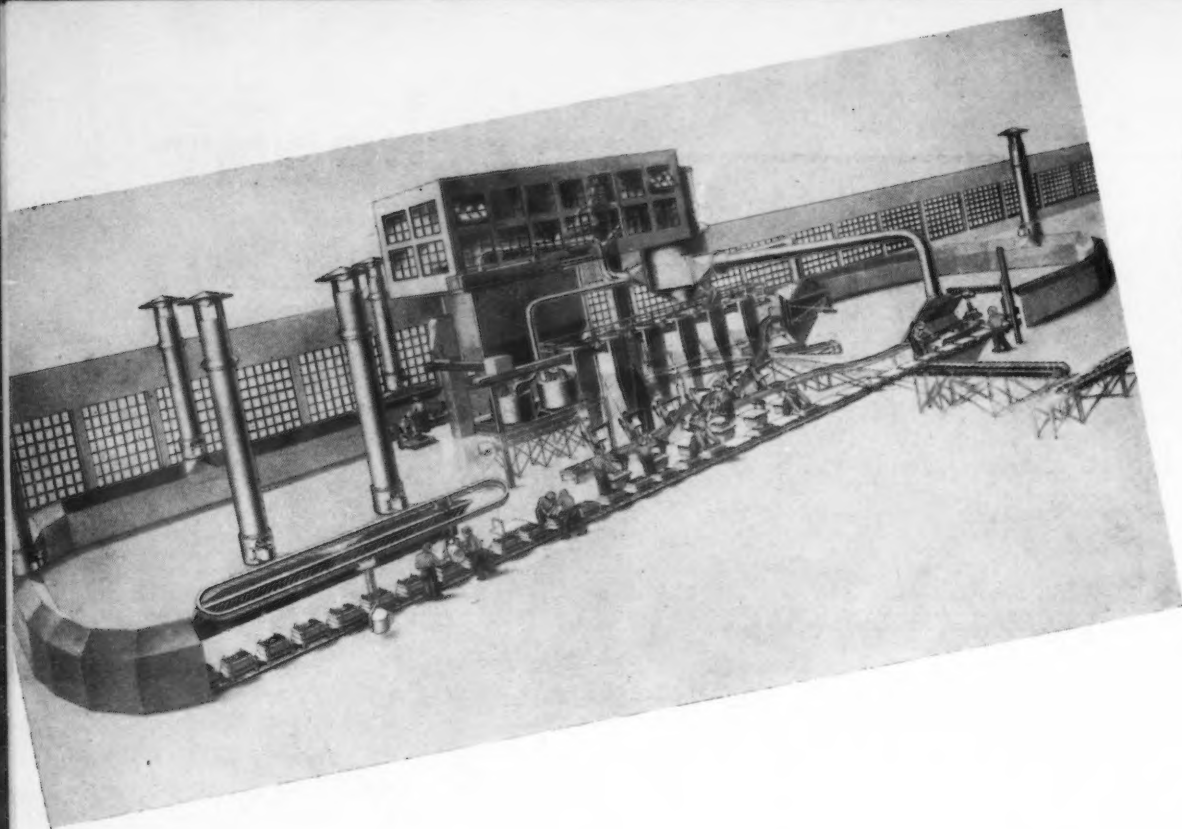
A complete mold conveyor unit with ventilated pouring station, cooling tunnel, shakeout stations, and sand conditioning equipment. Photo courtesy Claude B. Schneible Co.
